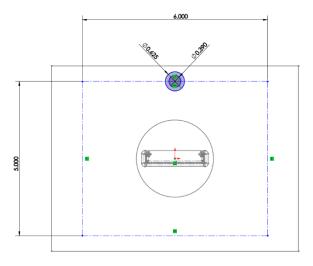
Counterbore and clearance hole on a rectangular die plate.
